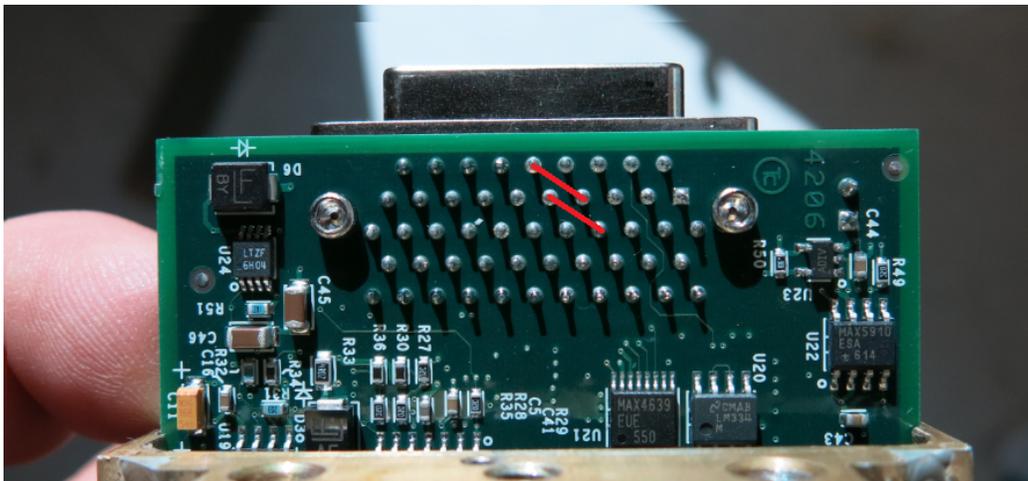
Solder side of bias card (intended modification is shown by red lines)
